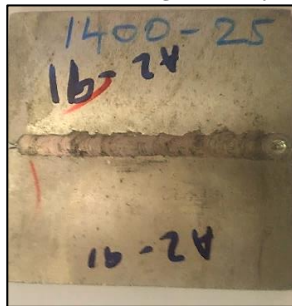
The weld was made at 1400rpm at 25 tool traverse speed with similar welding Az91 alloy
